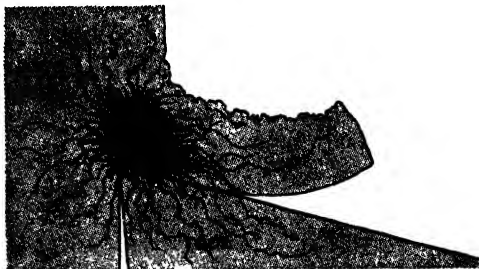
Grains of metal adjacent to the face of the tool being deformed by heat. (*The Shell Oil Company*)
